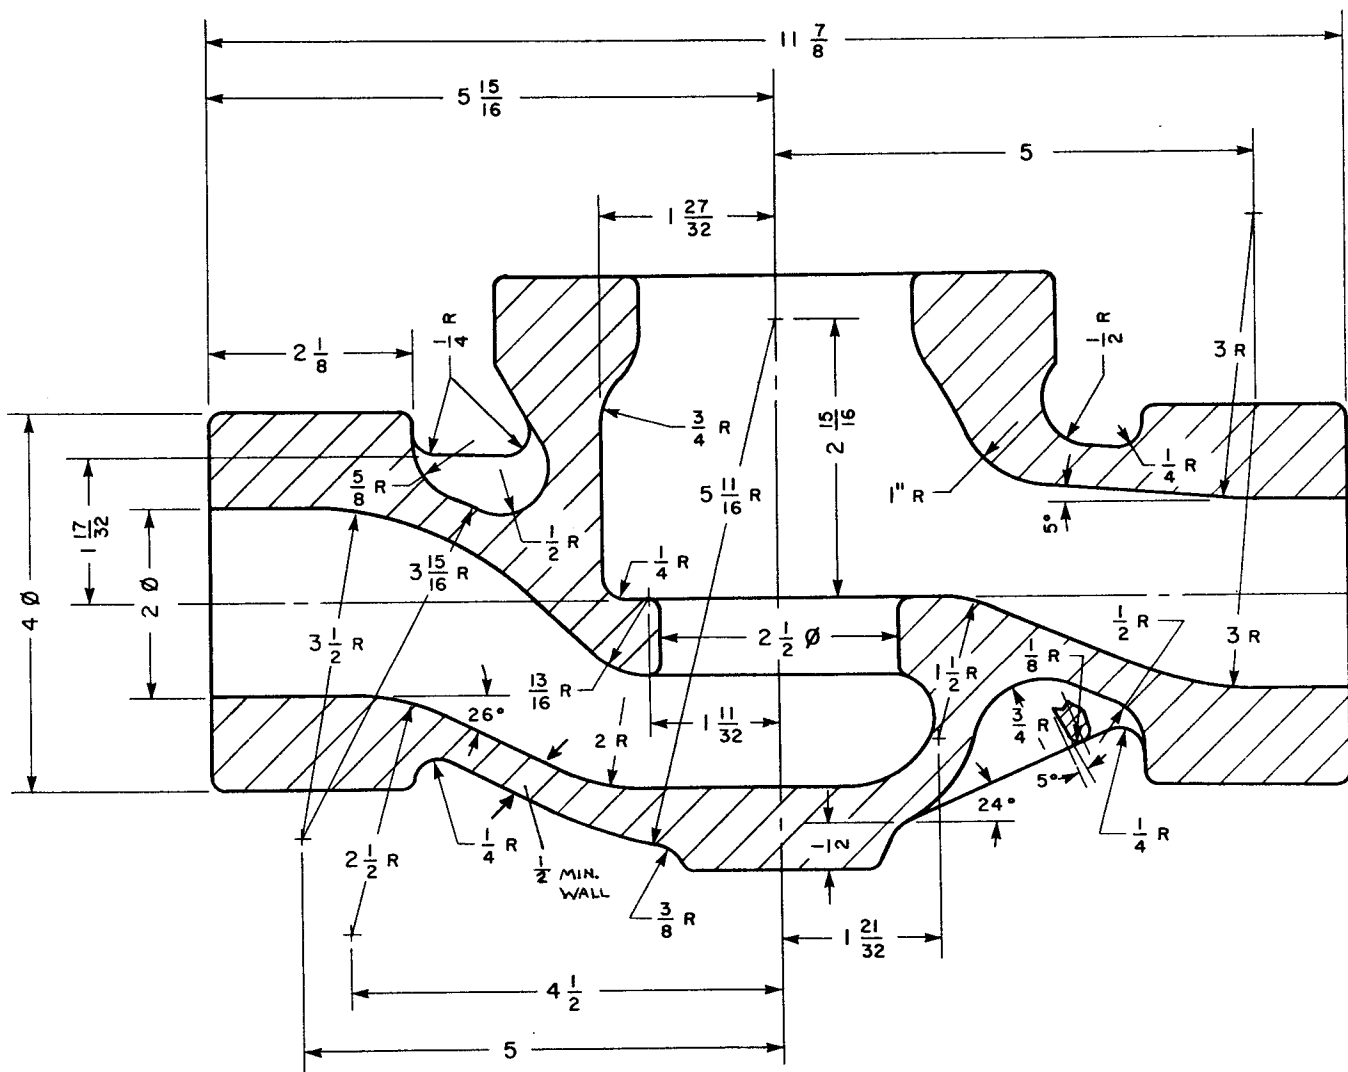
Casting drawing of section through valve (dimensions in inches, conversion: 1 in. = 25.4 mm).
